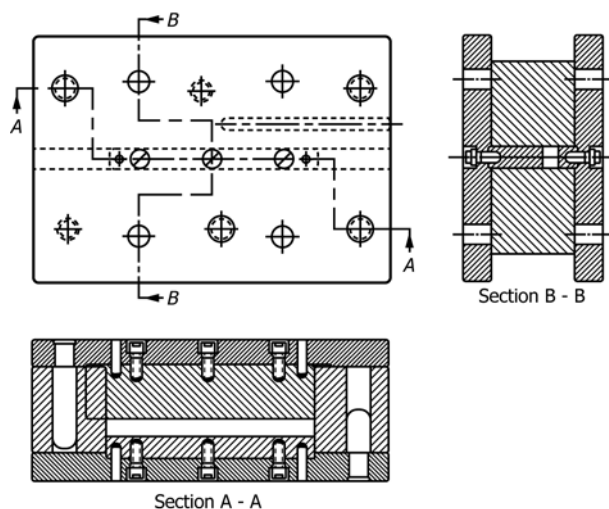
Single-Cavity Positive-Compression Mold for Bar Test Specimens
